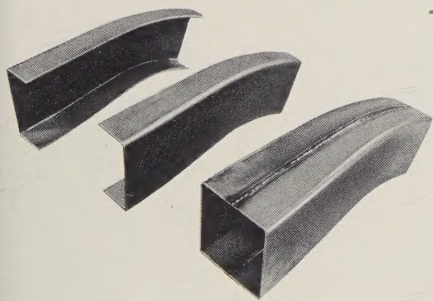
The side rail's center section is fabricated from left-hand and right-hand pressed metal stampings which are submerged arc welded together.
